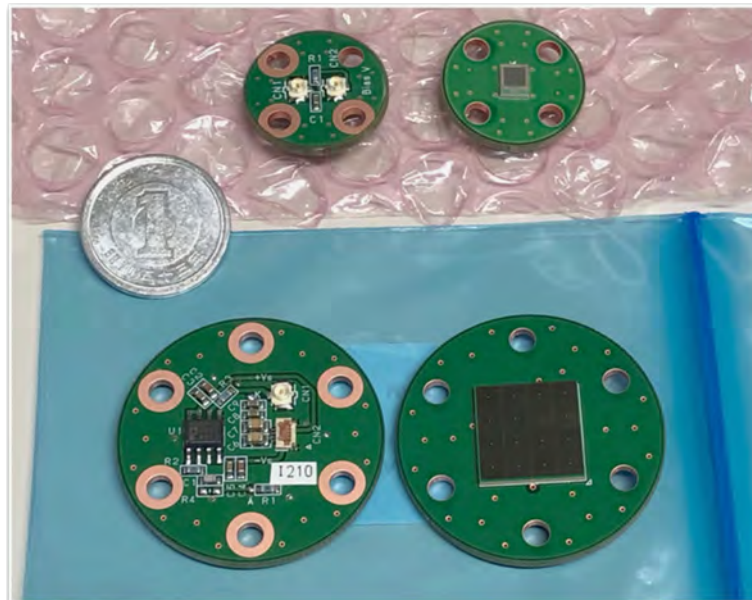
Photo of the MPPC unit. The upper side photo is the TagF-MPPC unit, which is mounted resistor, capacitor, and surface mount coaxial connector on the opposite side of the MPPC. The bottom side photo is the TagB-MPPC unit. The 4×4 array type MPPC is selected to detect photon from $20 \times 20 \text{ mm}^2$ scintillator. On the other side, there are surface-mount coaxial connectors for the amplifier circuit and signal readout, and flexible flat cable connectors for the power supply of the amplifier and the bias voltage of the MPPC. A one-yen coin (20 mm diameter) is placed for size comparison.
